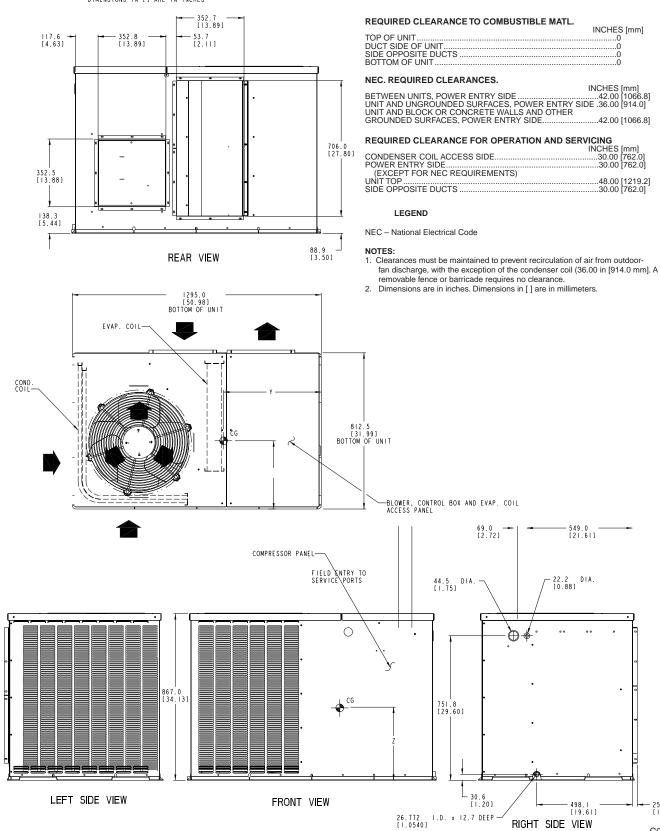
Unit	Base	Dimensions.	50ZH024-030
